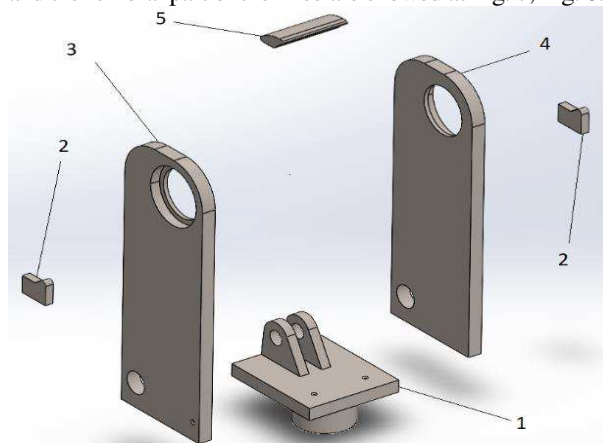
Exploded elements of the frame of the lower leg part of the knee: 1 - base, 2 - stops, 3 - bearing plate, 4 - bearing plate, 5 - membrane
